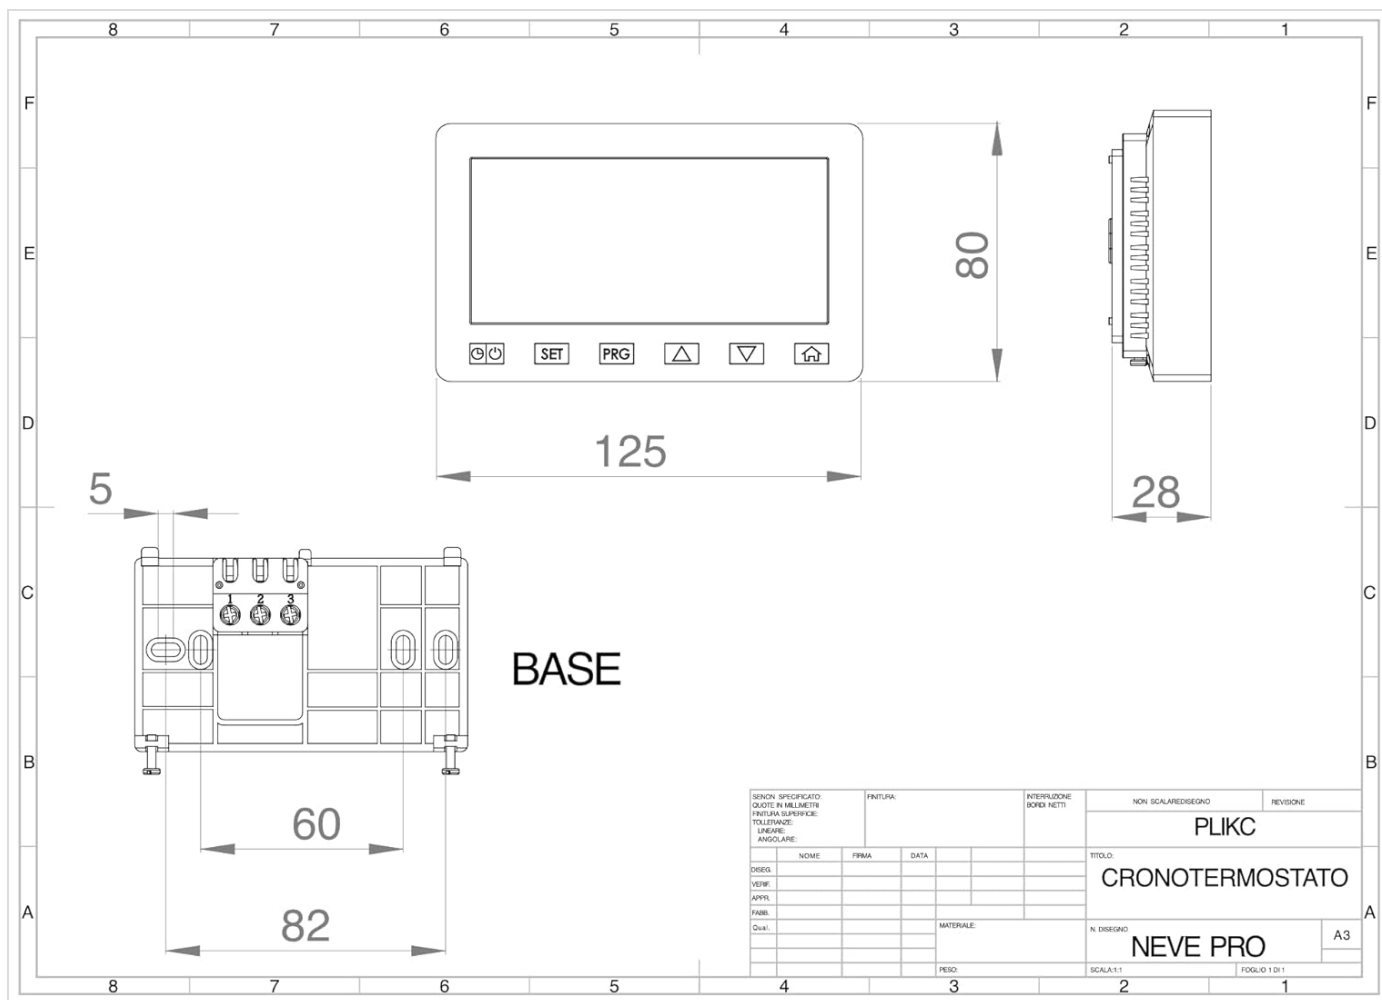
Dimensional drawing of the plikc Snow PRO thermostat, showing overall size and mounting base dimensions.
